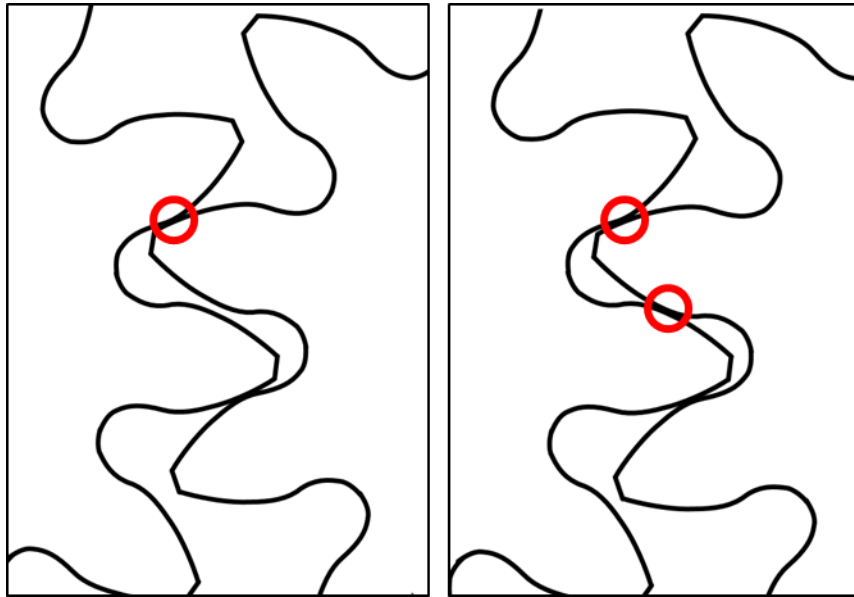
Single-flank contact (left) and dual-flank contact (right) gear designs.
